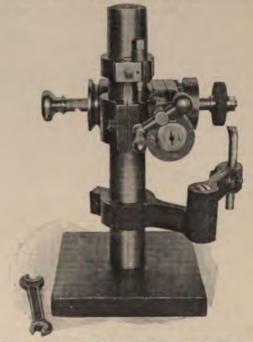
Cutter Grinder for Planer Milling Attachment.
